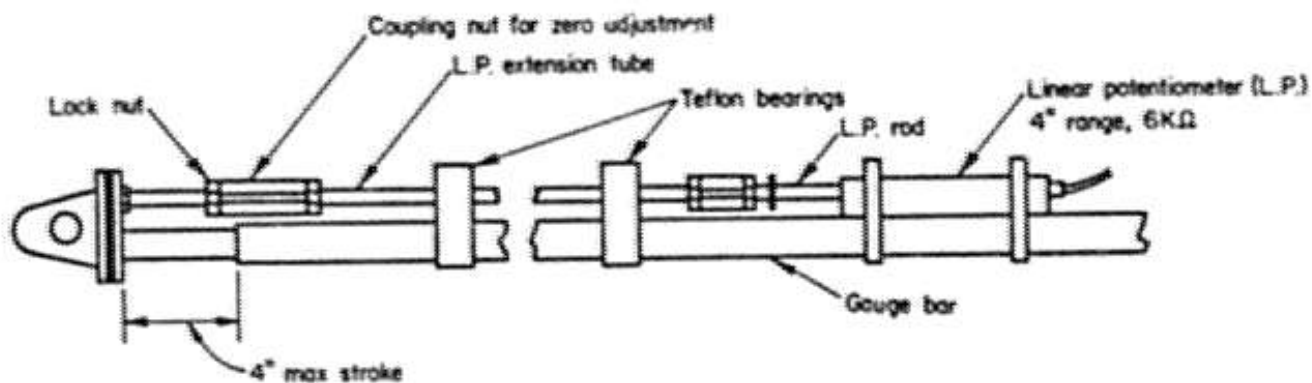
SKETCH OF LTLF GAUGE BAR LAYOUT FOR ELECTRONIC GAUGE MEASUREMENT
